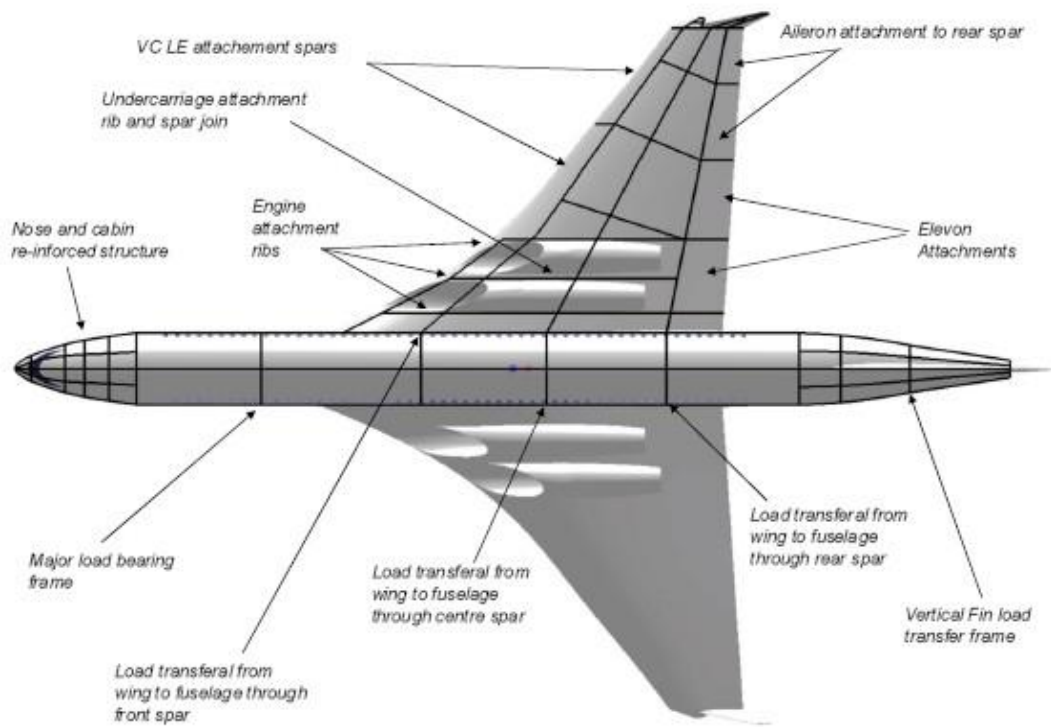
BDSF plan view layout of major structural components and critical attachment areas
